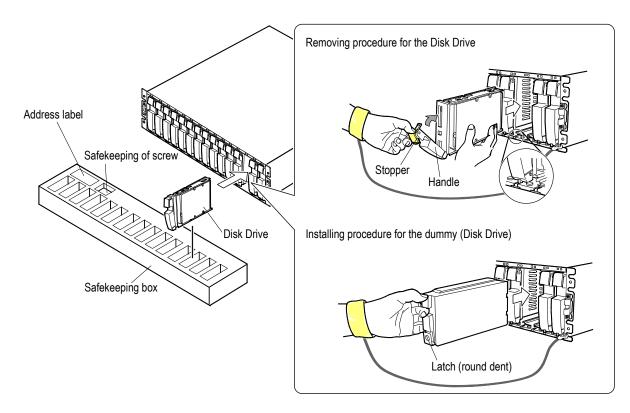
Removing the Disk Drive and Installing the Dummy (Disk Drive) (RKM/RKS/RKAK)
